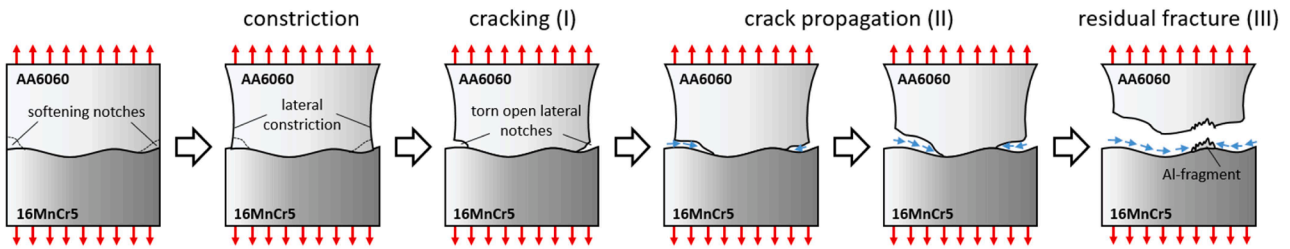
Failure principle of friction welded aluminum-steel joints in the tensile test [cf. Ma et al., 2021].
